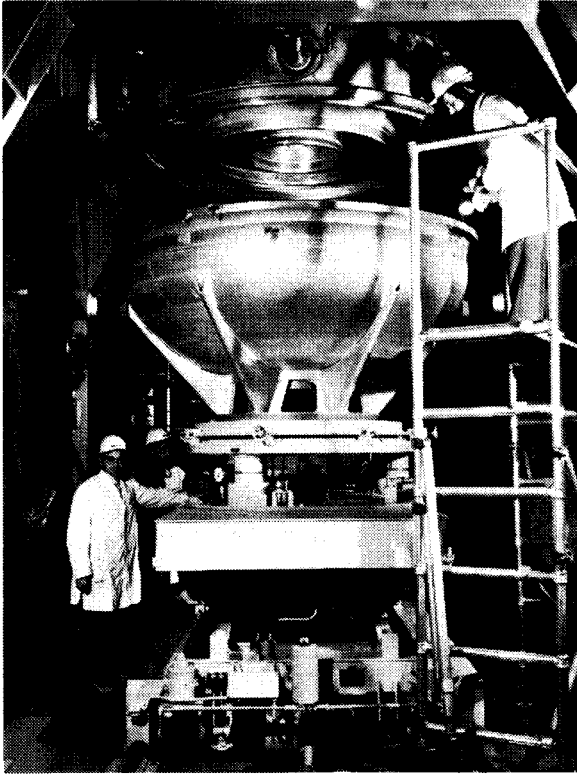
Lower part of the stage during assembly of the compressor; the two-stage cooler can be recognized in the upper part of the picture.
